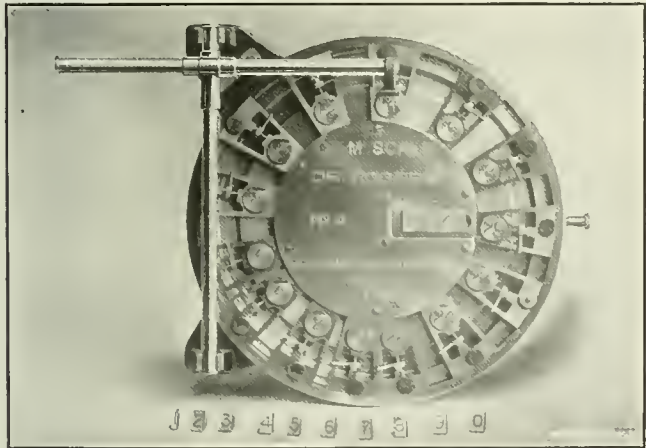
Jig Copyholder for Adjusting and Holding Copy to suit each Disk
